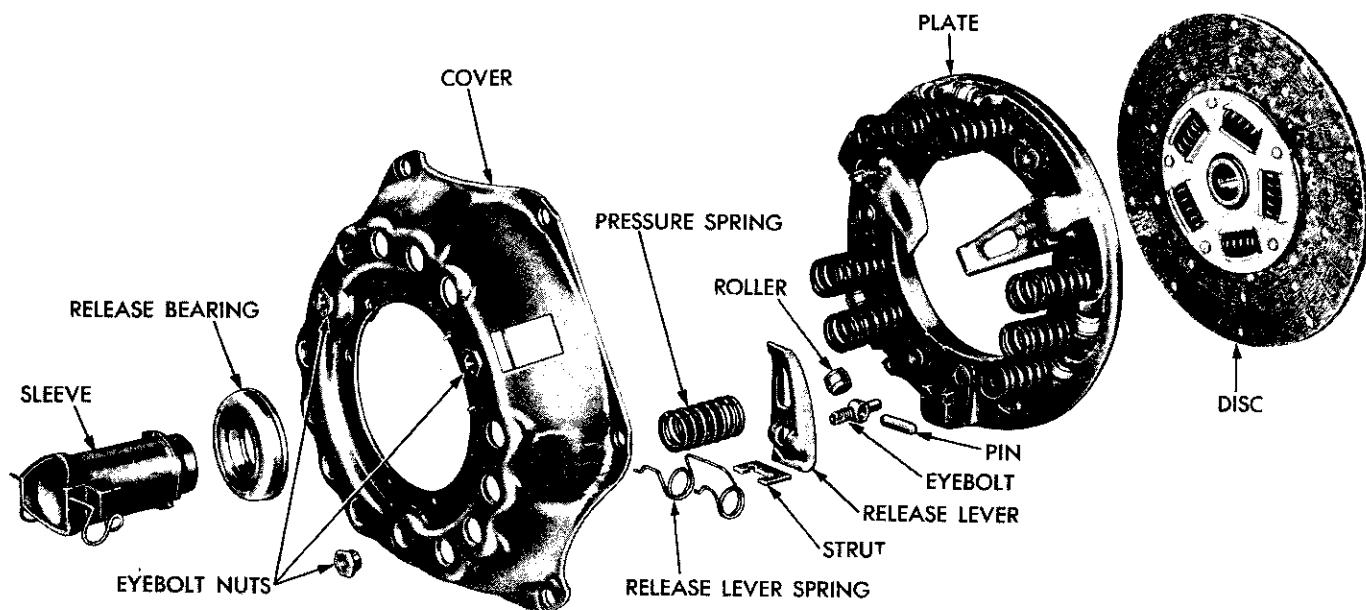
Semi-Centrifugal Clutch (Exploded View)
